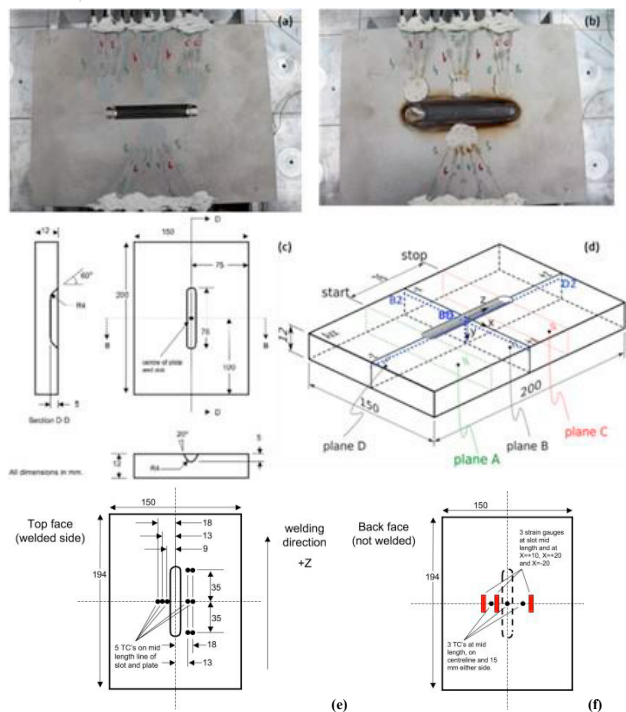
Specimen A6 instrumented with thermocouples (a) before and (b) after welding. (c) Schematic representation of the TG6 specimen showing the dimensions of the plate and the machined slot and (d) the co-ordinate system. Start and stop refer to the start and stop ends of the weld. The nominal thermocouple positions on the (e) top and (f) bottom surface of the specimen [13].
